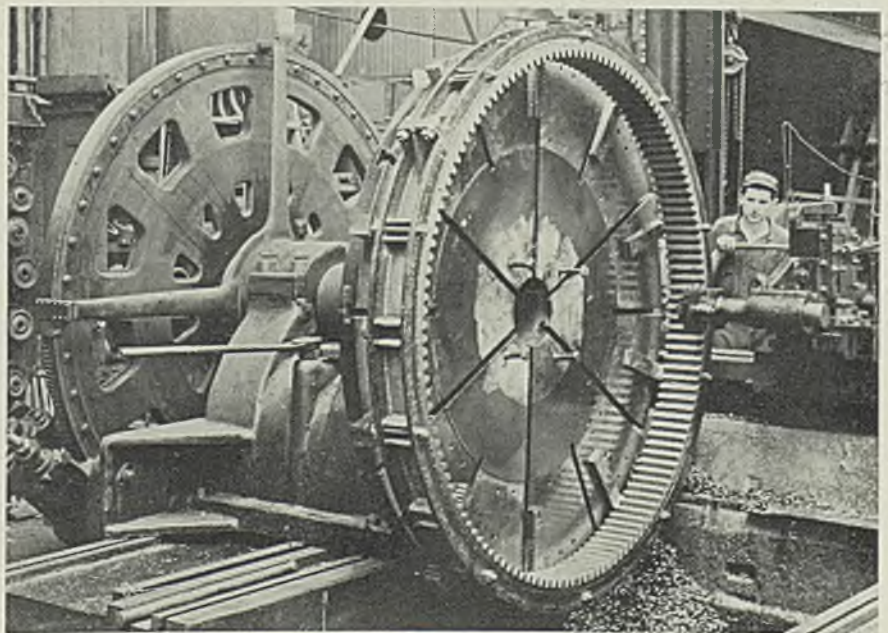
One of six 80-inch pitch diameter internal gears of nickel-copper steel welded construction, heat treated after welding for stress relief
